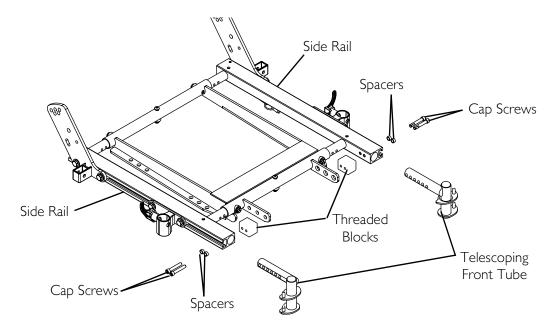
Adjusting/Replacing Telescoping Front Rigging Supports - Adjustable ASBA Seat
